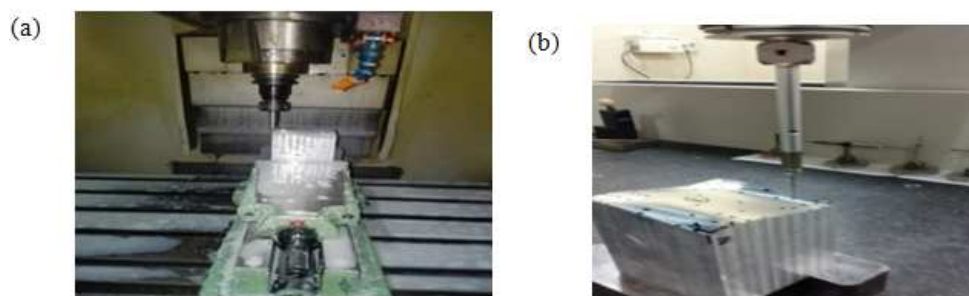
(a): CNC Machining of Free-Form Surface (b) CMM Measurement
